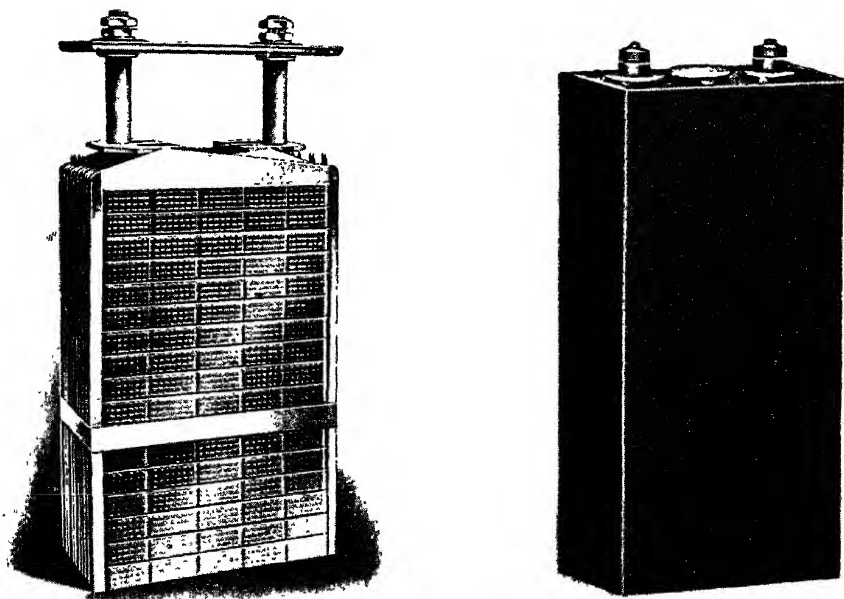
Plate Assembly for Ni-Fe Cell.
